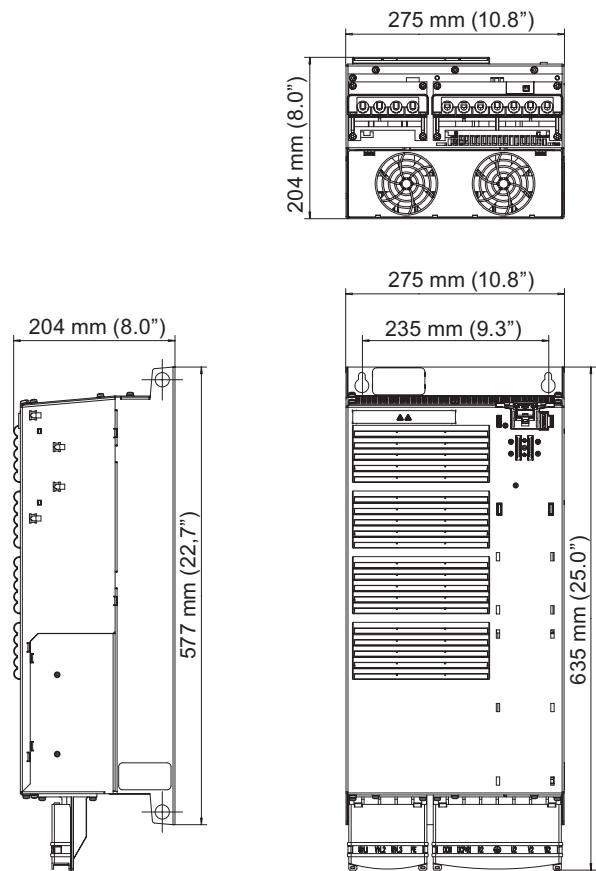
Dimensional drawing PM250 FSE, 400V (filtered)
